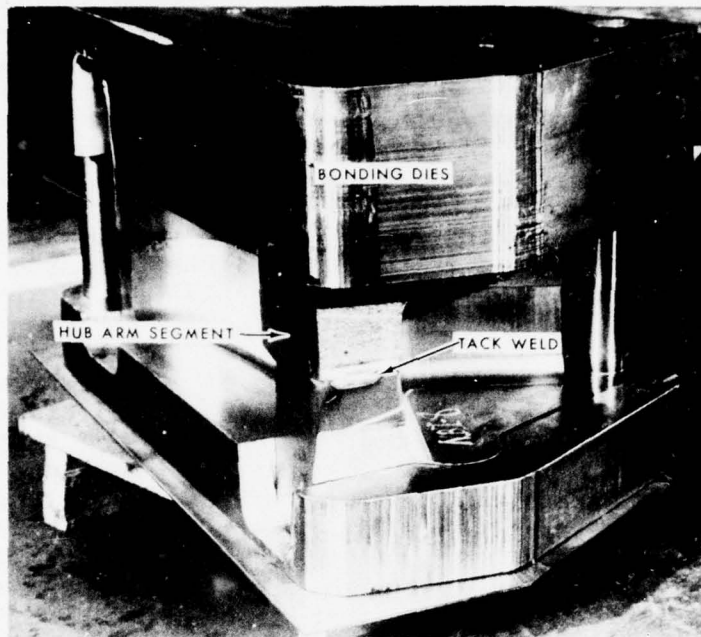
FIRST ARM SEGMENT TACK WELDED AND SEATED BETWEEN BONDING DIES.
